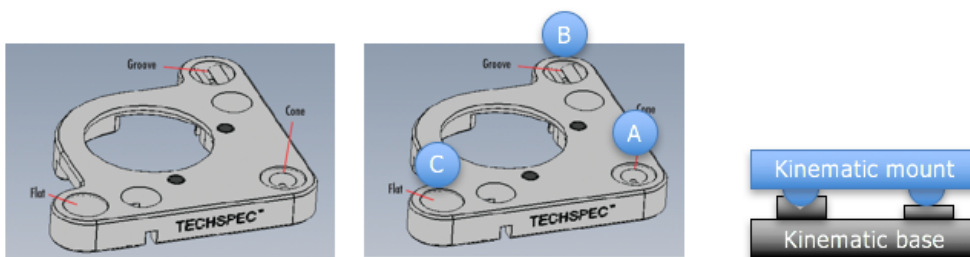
Illustration of principal of kinematic mounting. Here the base contains the three geometric elements: a cone, a groove and a flat, while the mount contains 3 mating spherical interfaces (labelled A,B and C). The intersection of A with the cone constrains all 3 translational degrees of freedom. The intersection of B with the groove constrains two of the rotational degrees of freedom. Lastly, the intersection of C with the flat constrains the final rotational degree of freedom.
